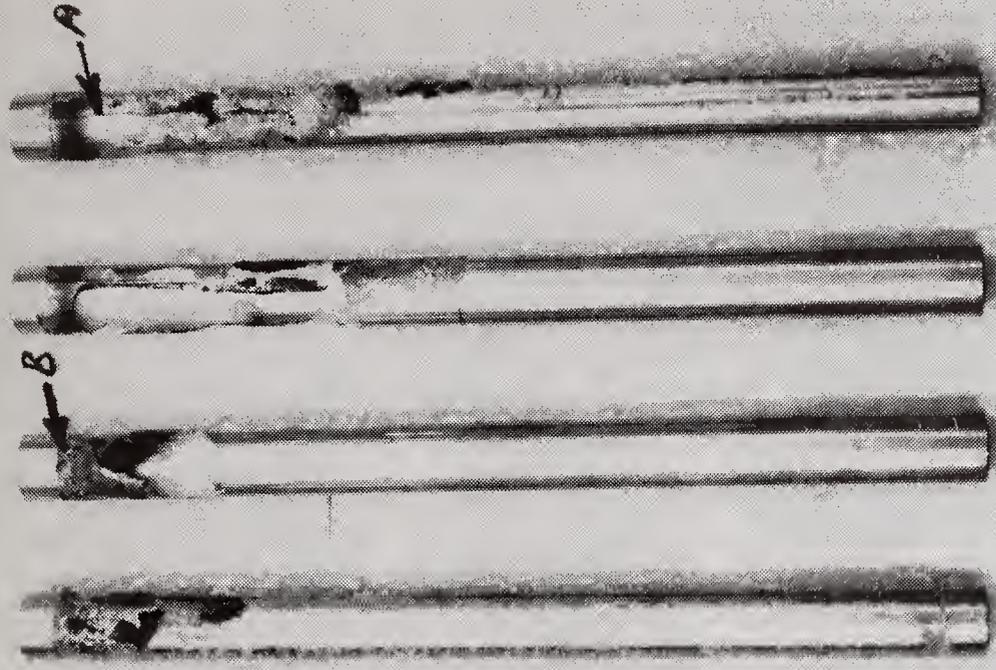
Type 409 stainless tube with a high-frequency welded seam after exposure for 4 years at Site G. Note corrosion at weld seam, arrow A and crevice corrosion at arrow B. All specimens were perforated due to corrosion. X 0.375.
